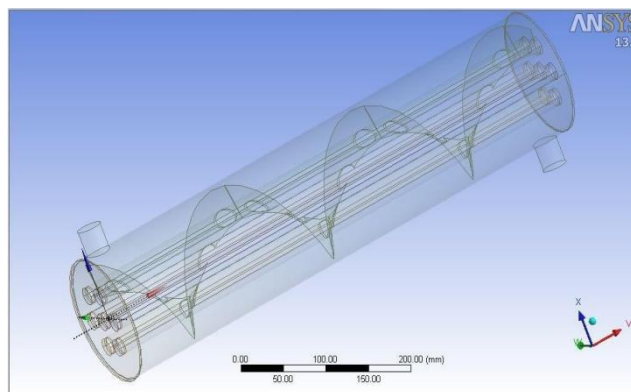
Isometric view of arrangement of baffles and tubes of shell and tube heat exchanger with baffle inclination.
